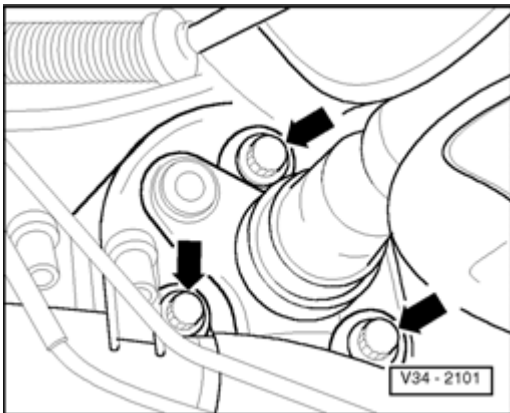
Identifying Bevel Gear Transfer Case Flange Bolts
